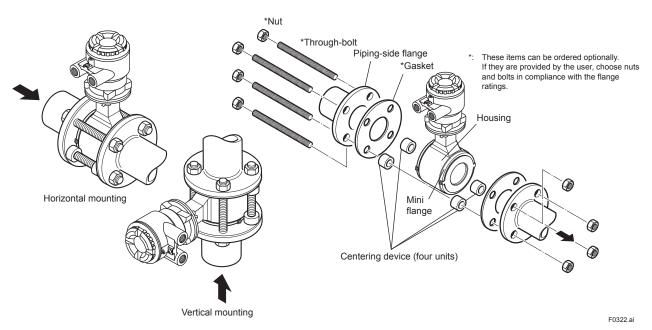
Mounting Procedure for Wafer Type (sizes: 50 to 200 mm (2 to 8 in.))
